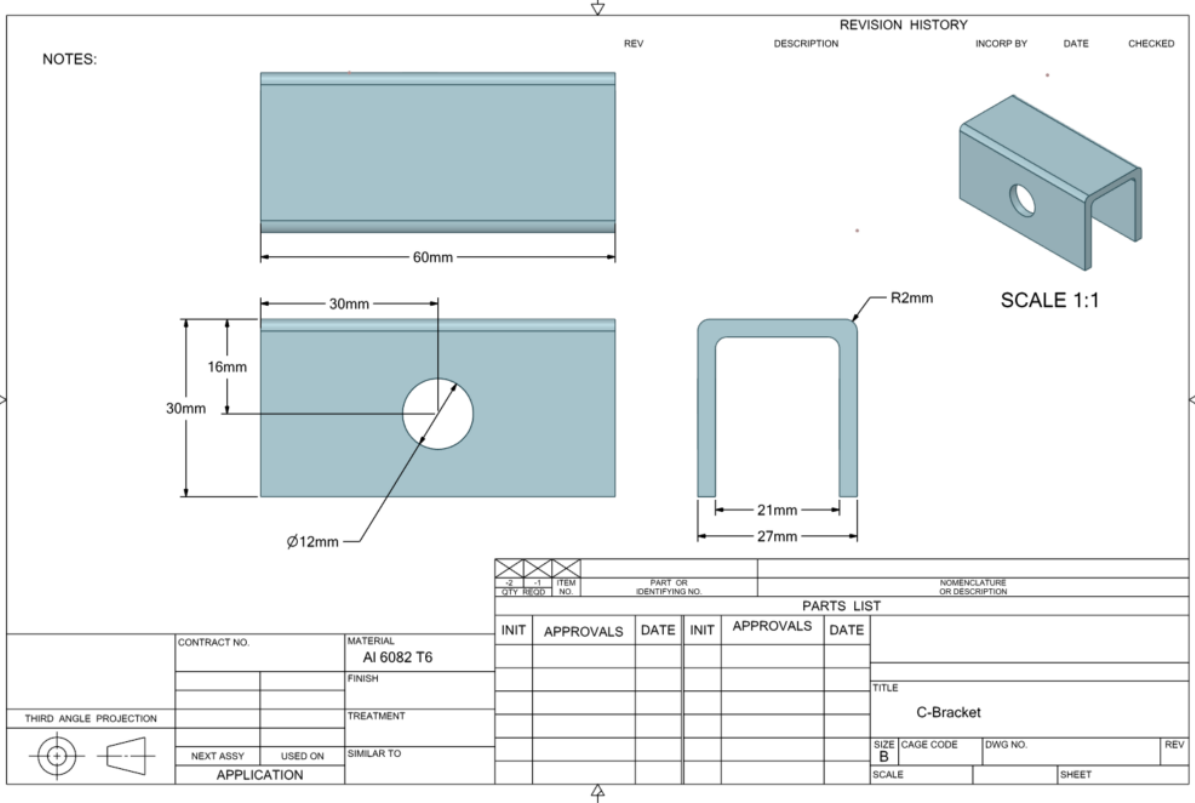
Aluminium 6082 T6 C-Bracket Inserts Drawing
